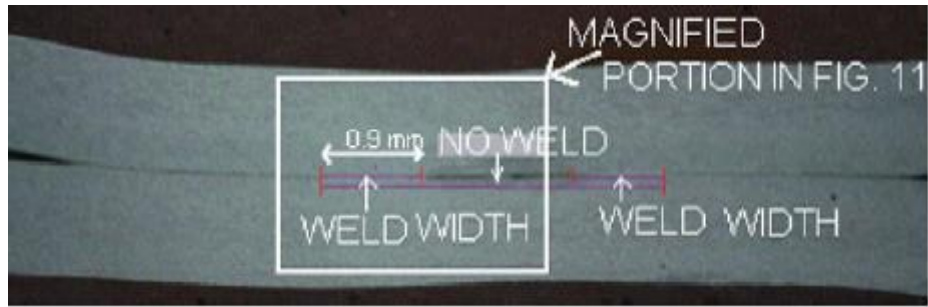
Al to Al electromagnetically welded sample showing weld and no-weld zones [46].
